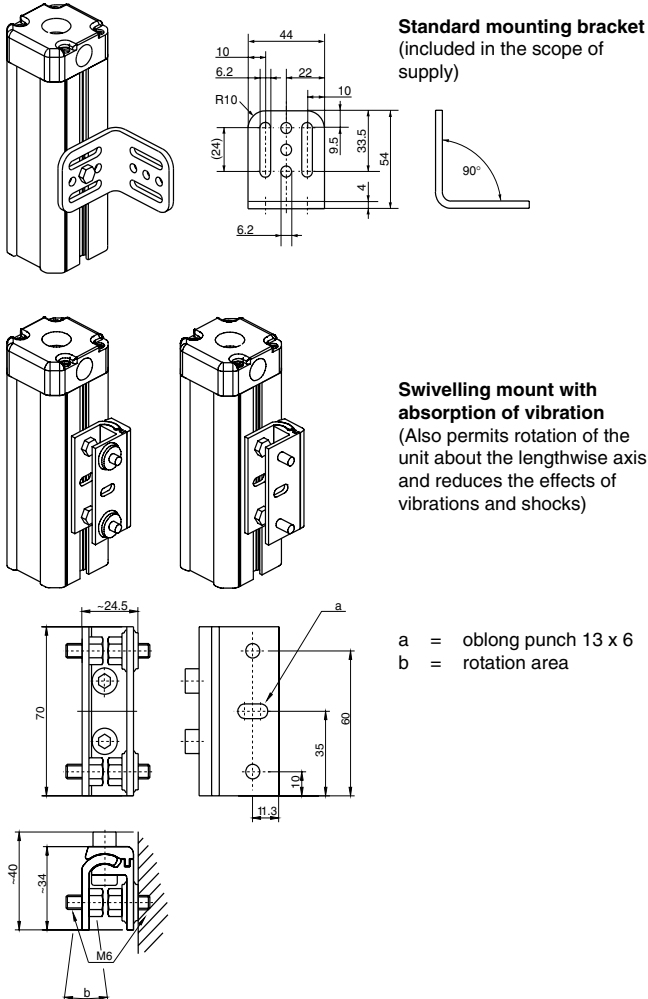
Mechanical mounting for COMPACT light curtains and light grids
